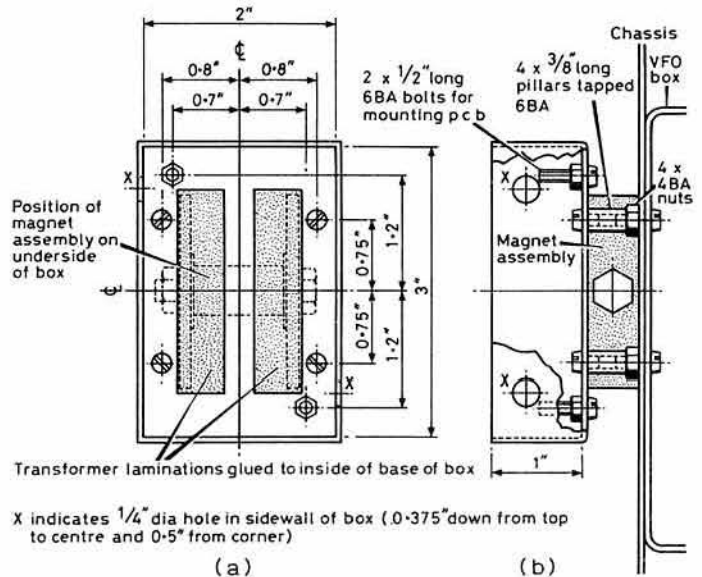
Assembly of the 4,433kHz filter box and magnet. (a) Top view of box. (b) Side view showing how the magnet assembly is held between the box and the chassis
